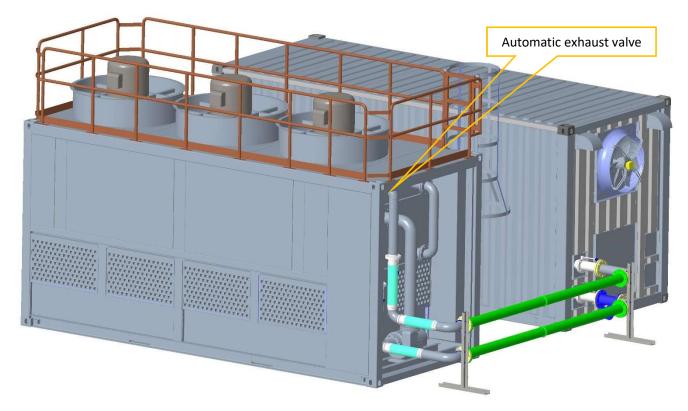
External connecting pipelines - automatic exhaust valve
